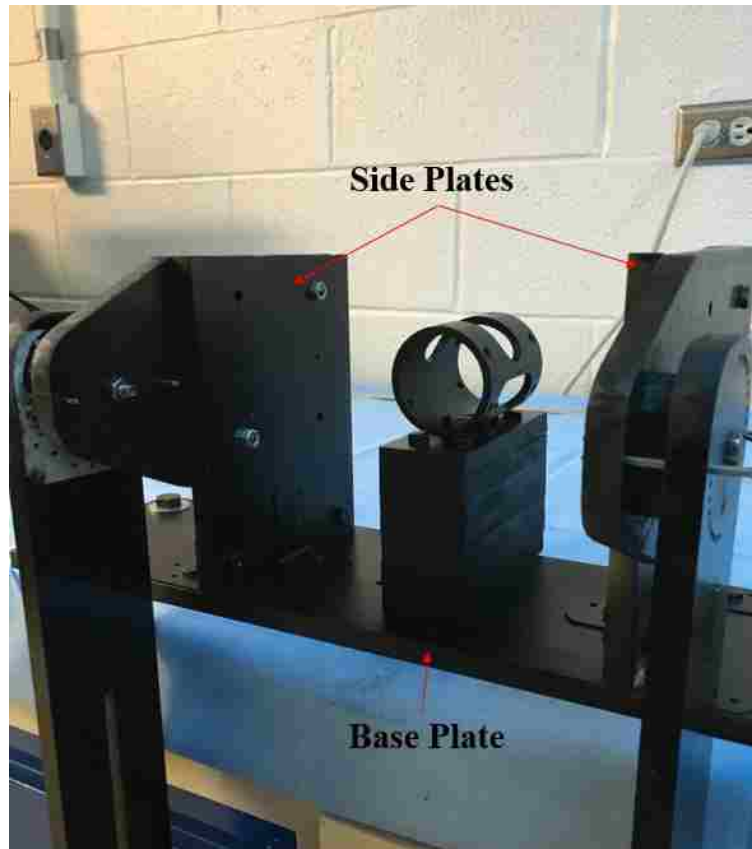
Mounted testing fixture. The base and two side plates are highlighted.
